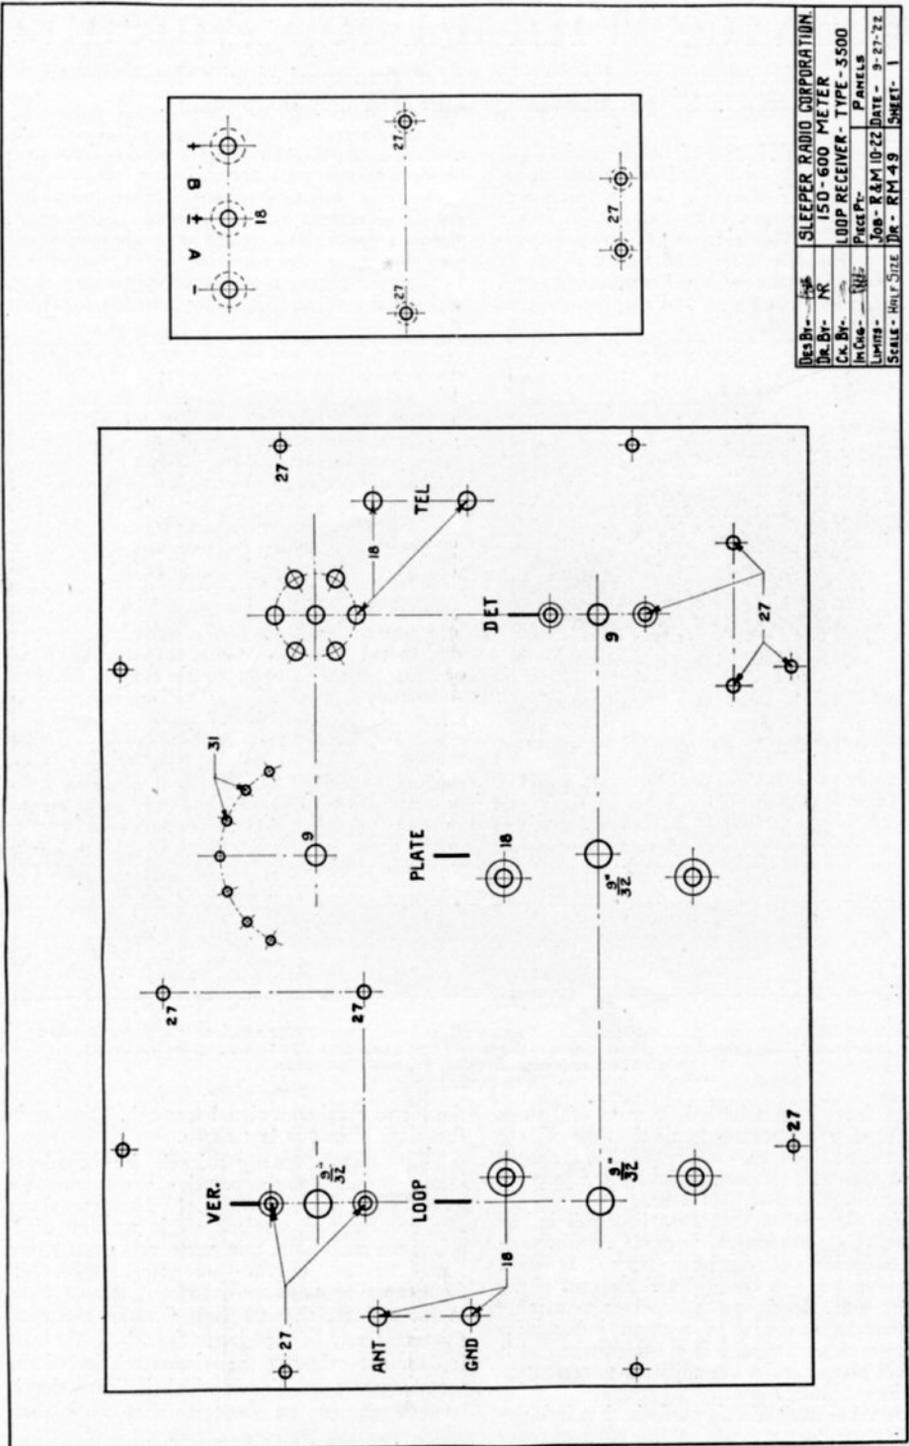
Exactly one-half size. Drawing of the front and back panels, showing the location of the holes and engraving. When you lay out your panels, double each dimension on these drawings
